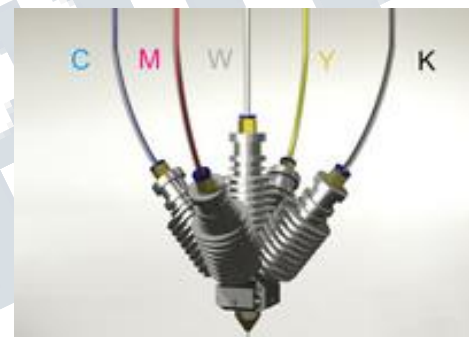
Multi Color 3D Printer Extrusion Assembly Drawing
